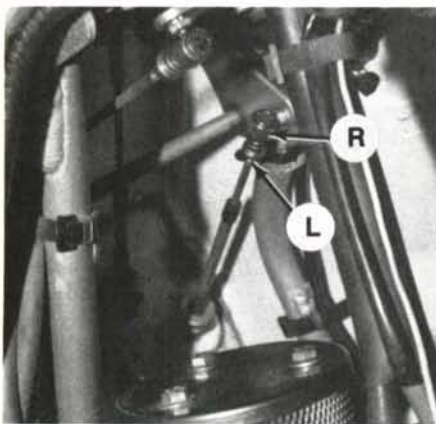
On JF650 models, loosen locknut (L) and remove joint (R) from ball joint on steering arm and rotate joint (R) up or down on threaded end of steering cable as needed to center jet pump steering nozzle when steering handlebar is in a straight ahead position.
